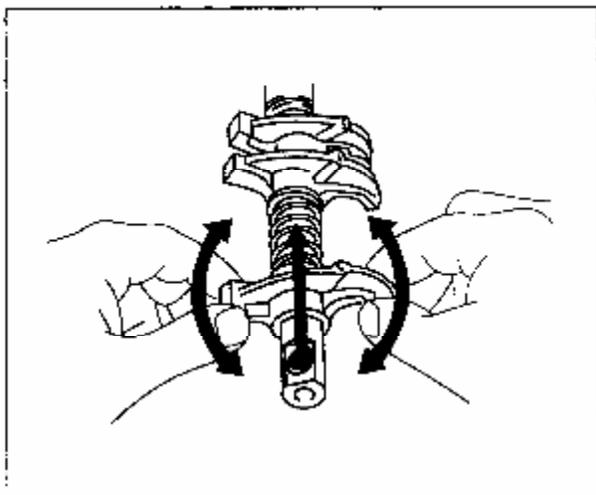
Check Valve Rocker Arm and Rocker Arm Shaft
